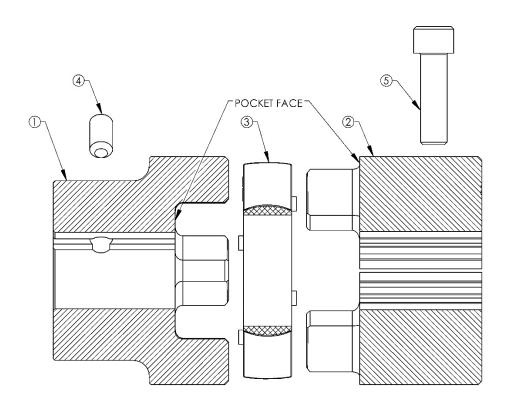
HORIZONTAL (T10) TAPER GRID COUPLING (EXPLODED VIEW)
